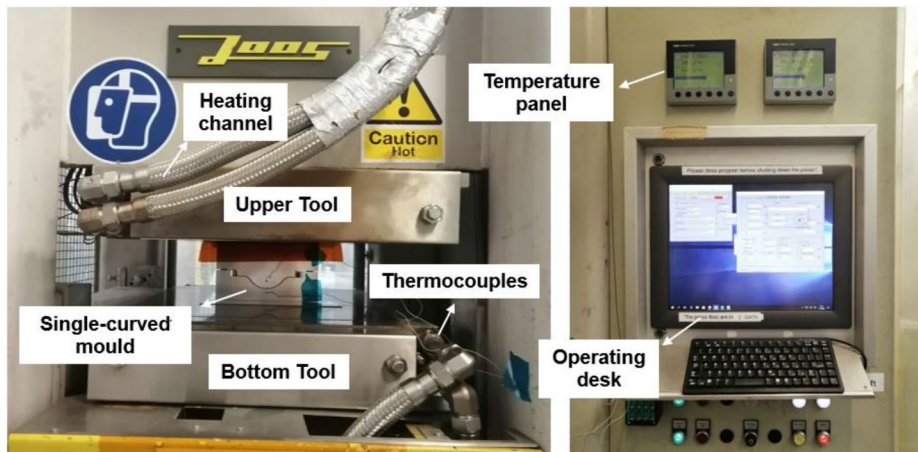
Experimental setup and apparatus for the hybrid laminate hot-pressing process
